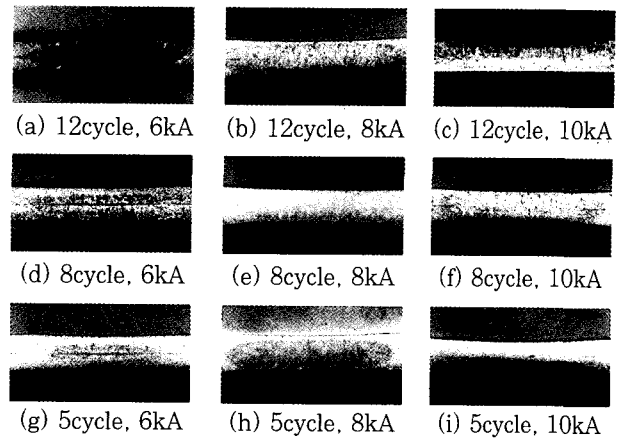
Nugget formation of various welding conditions (plain carbon steel, 250kgf, 0.7t)
